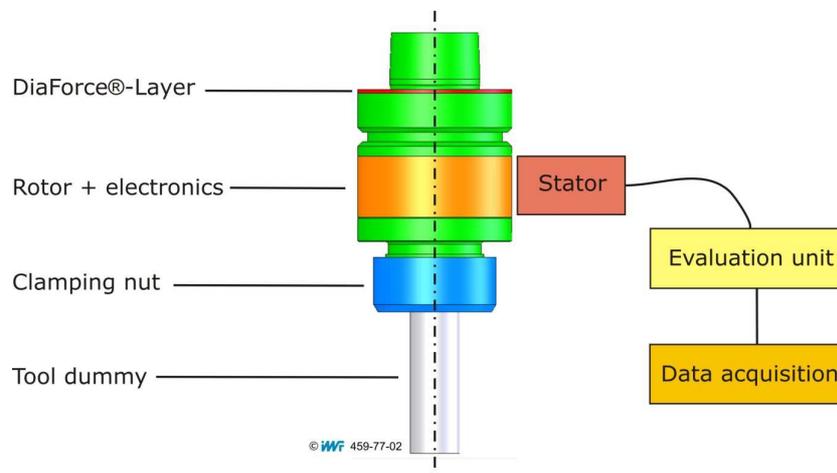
Scheme of the sensor-integrated tool holder with integrated telemetric module
